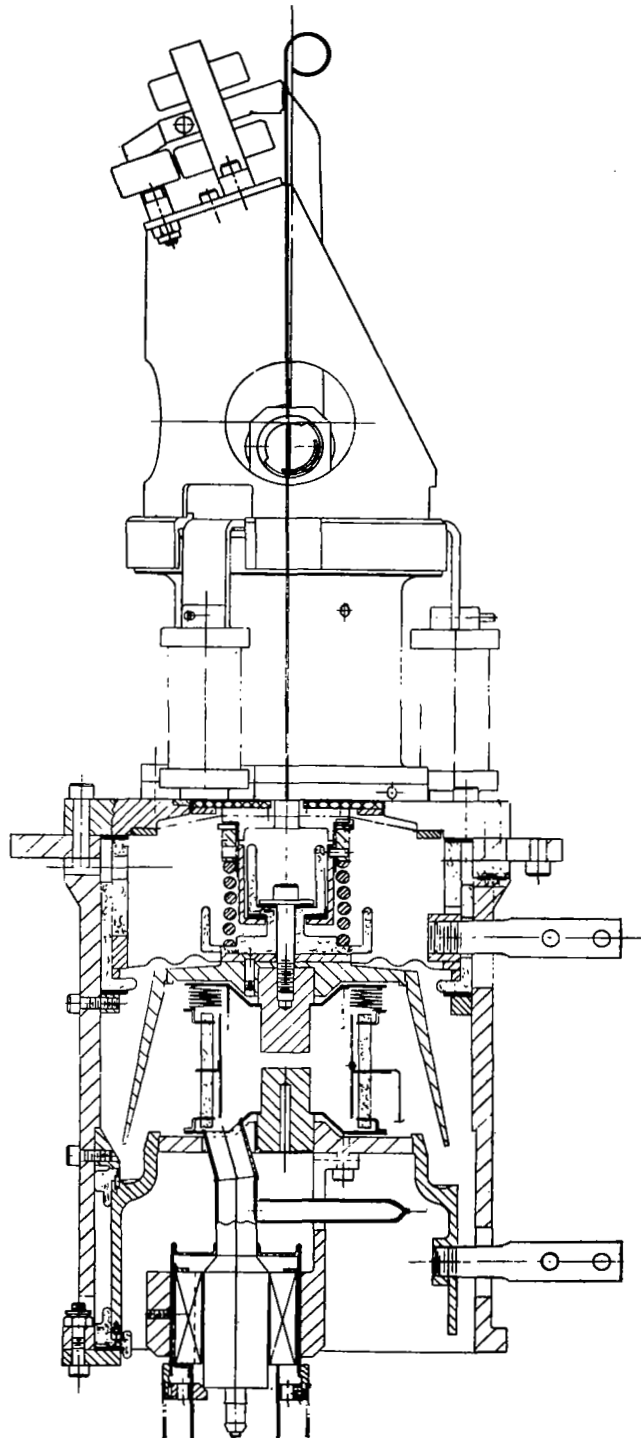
Layout of AC Circuit Breaker, Showing Actuator (Mechanism) Attached to Interrupter Unit.
